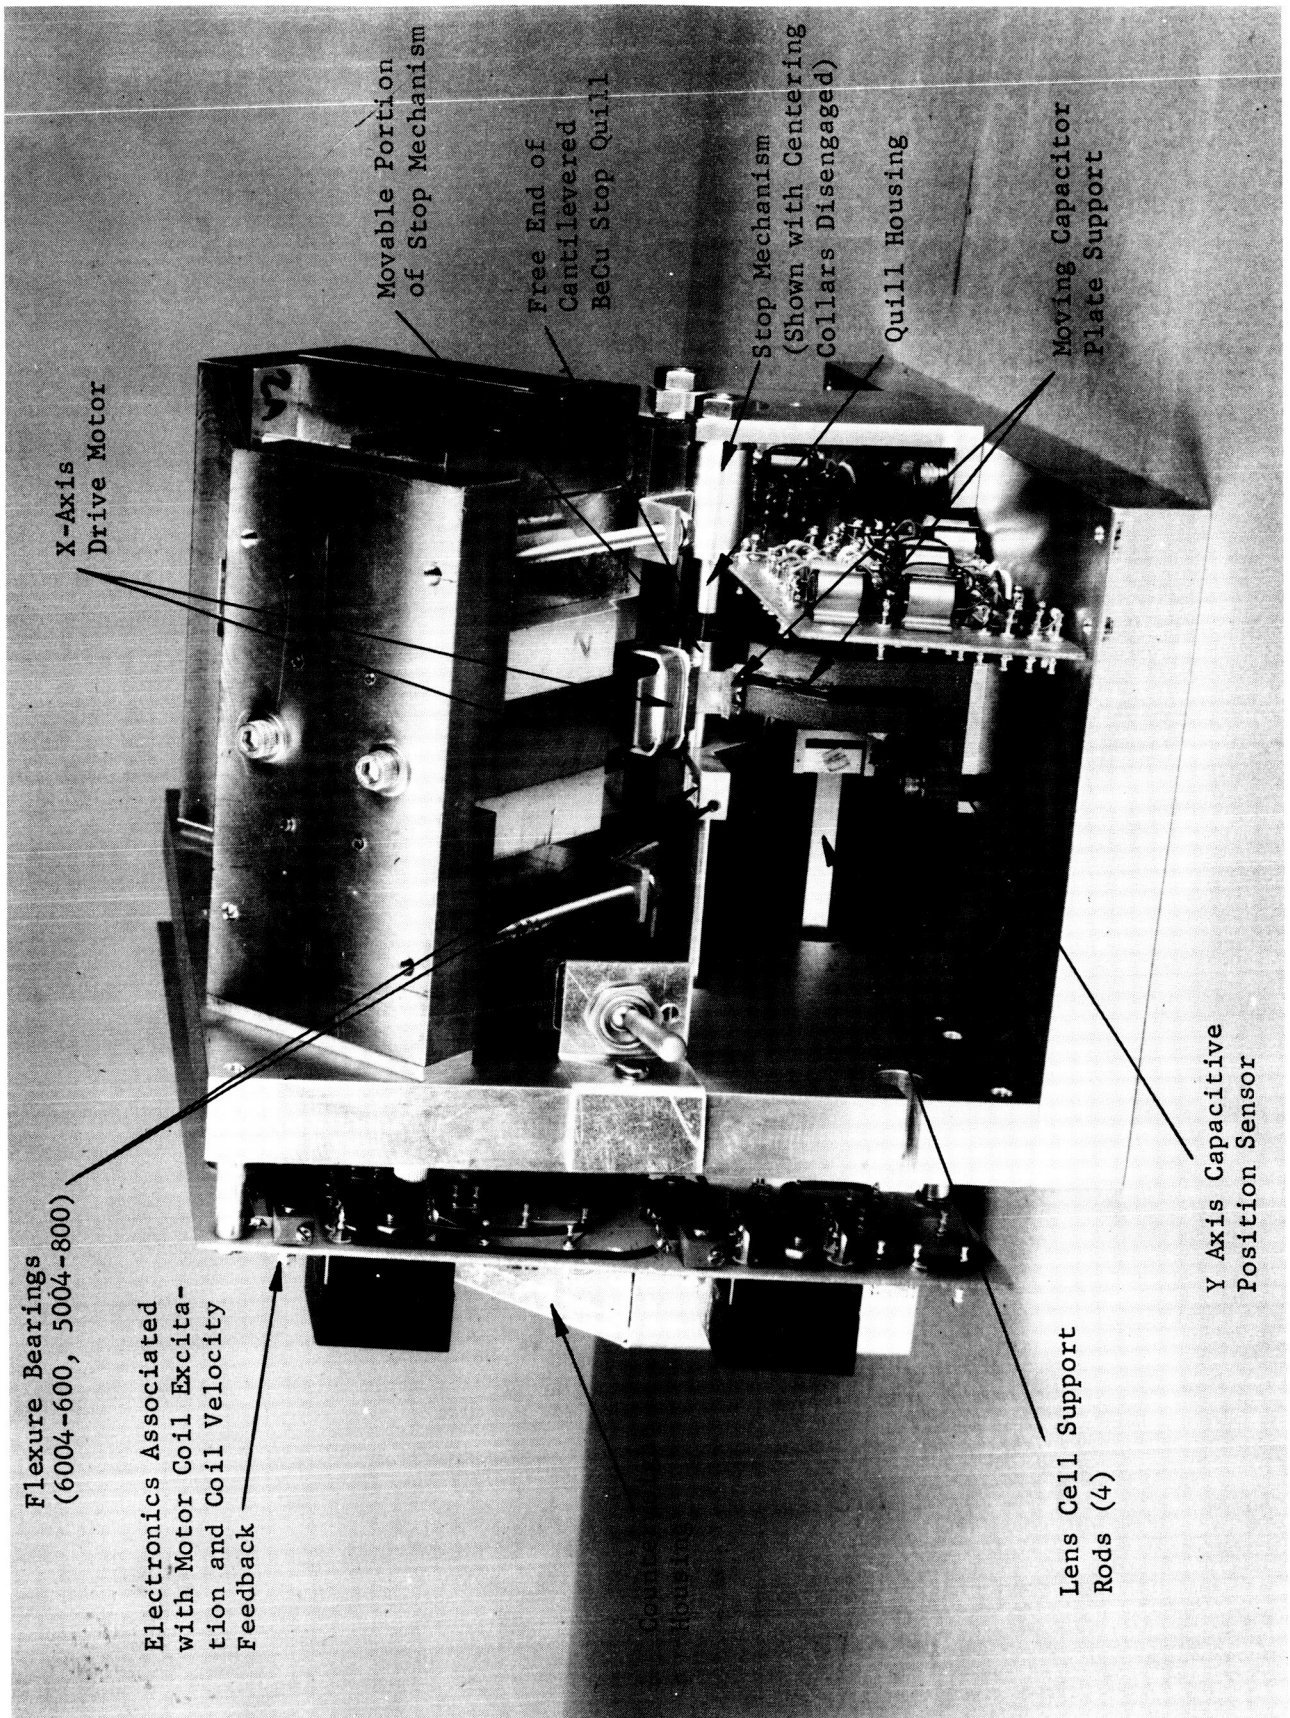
Transfer Lens Mechanical Subassembly, Side View
